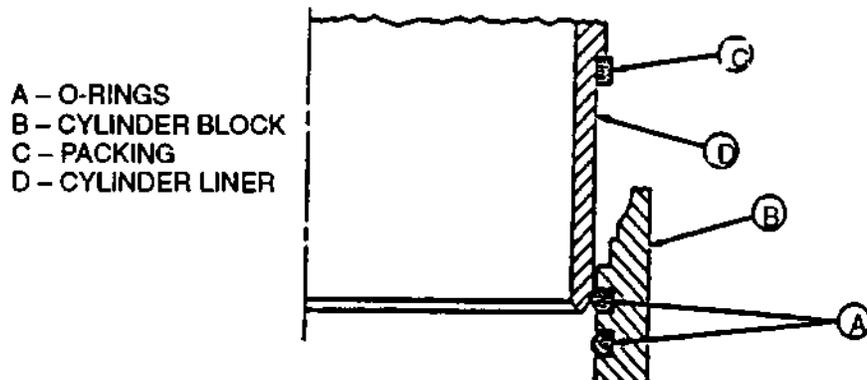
Cylinder Liner O-Rings and Packing
